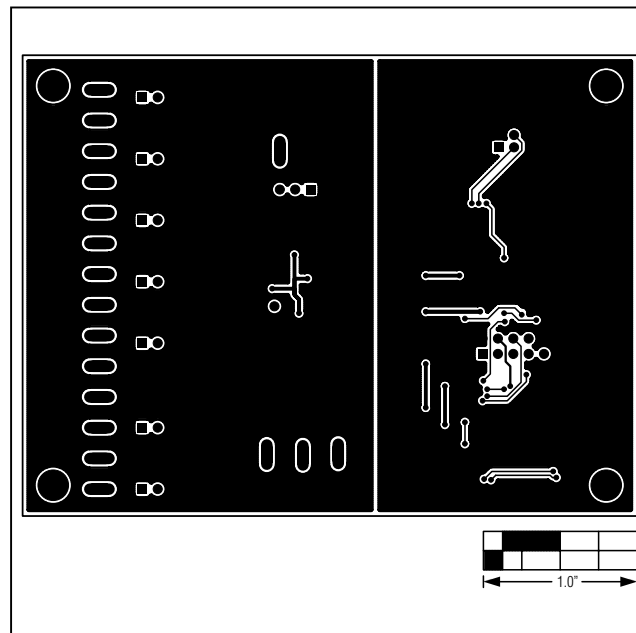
MAX6581 EV Kit PCB Layout—Solder Side
